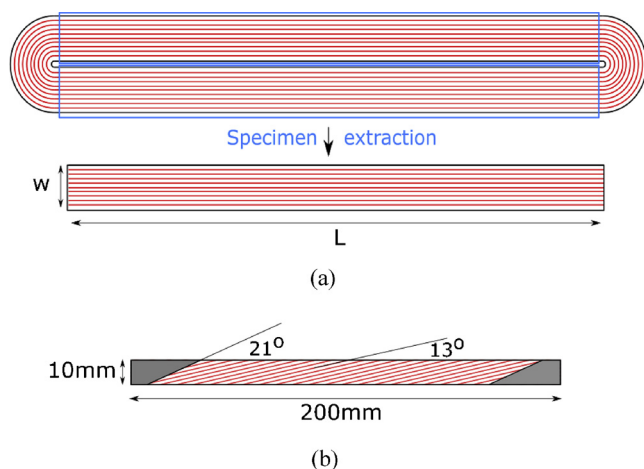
Print schematic of (a) unidirectional tensile and flexural specimens and specimen extraction and (b) shear specimens, showing carbon fibre path.
